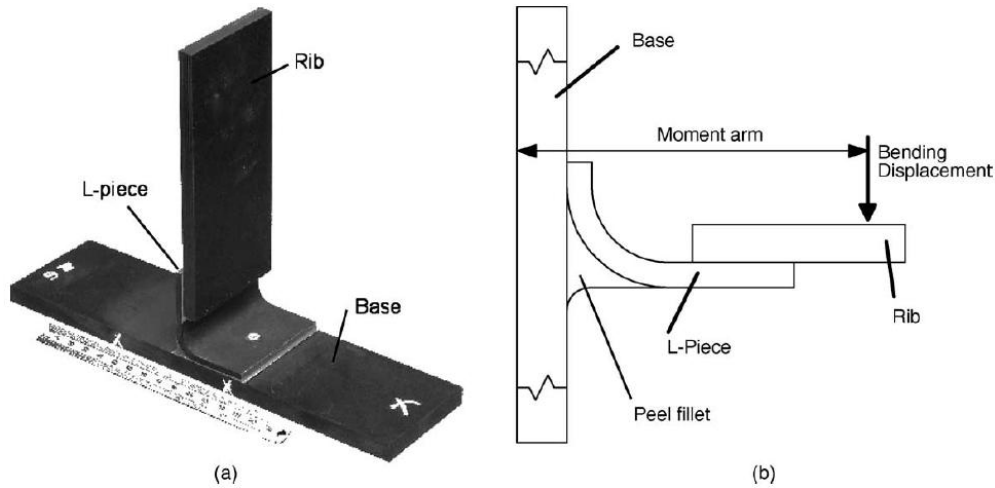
(a) Angled L-shaped composite joint connecting rib and base structures, (b) bending displacement loading that creates failure [13]
